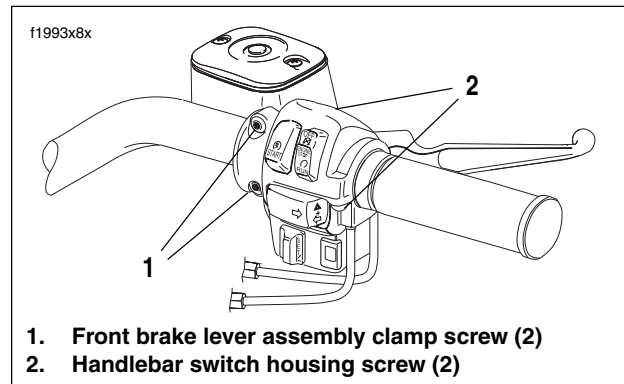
Handlebar Lever and Control Mounting Screws (Right Side Shown)
